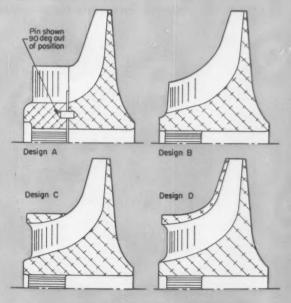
Various impeller designs. Shrouded Designs C and D minimize vibration in contrast to Designs A and B.
